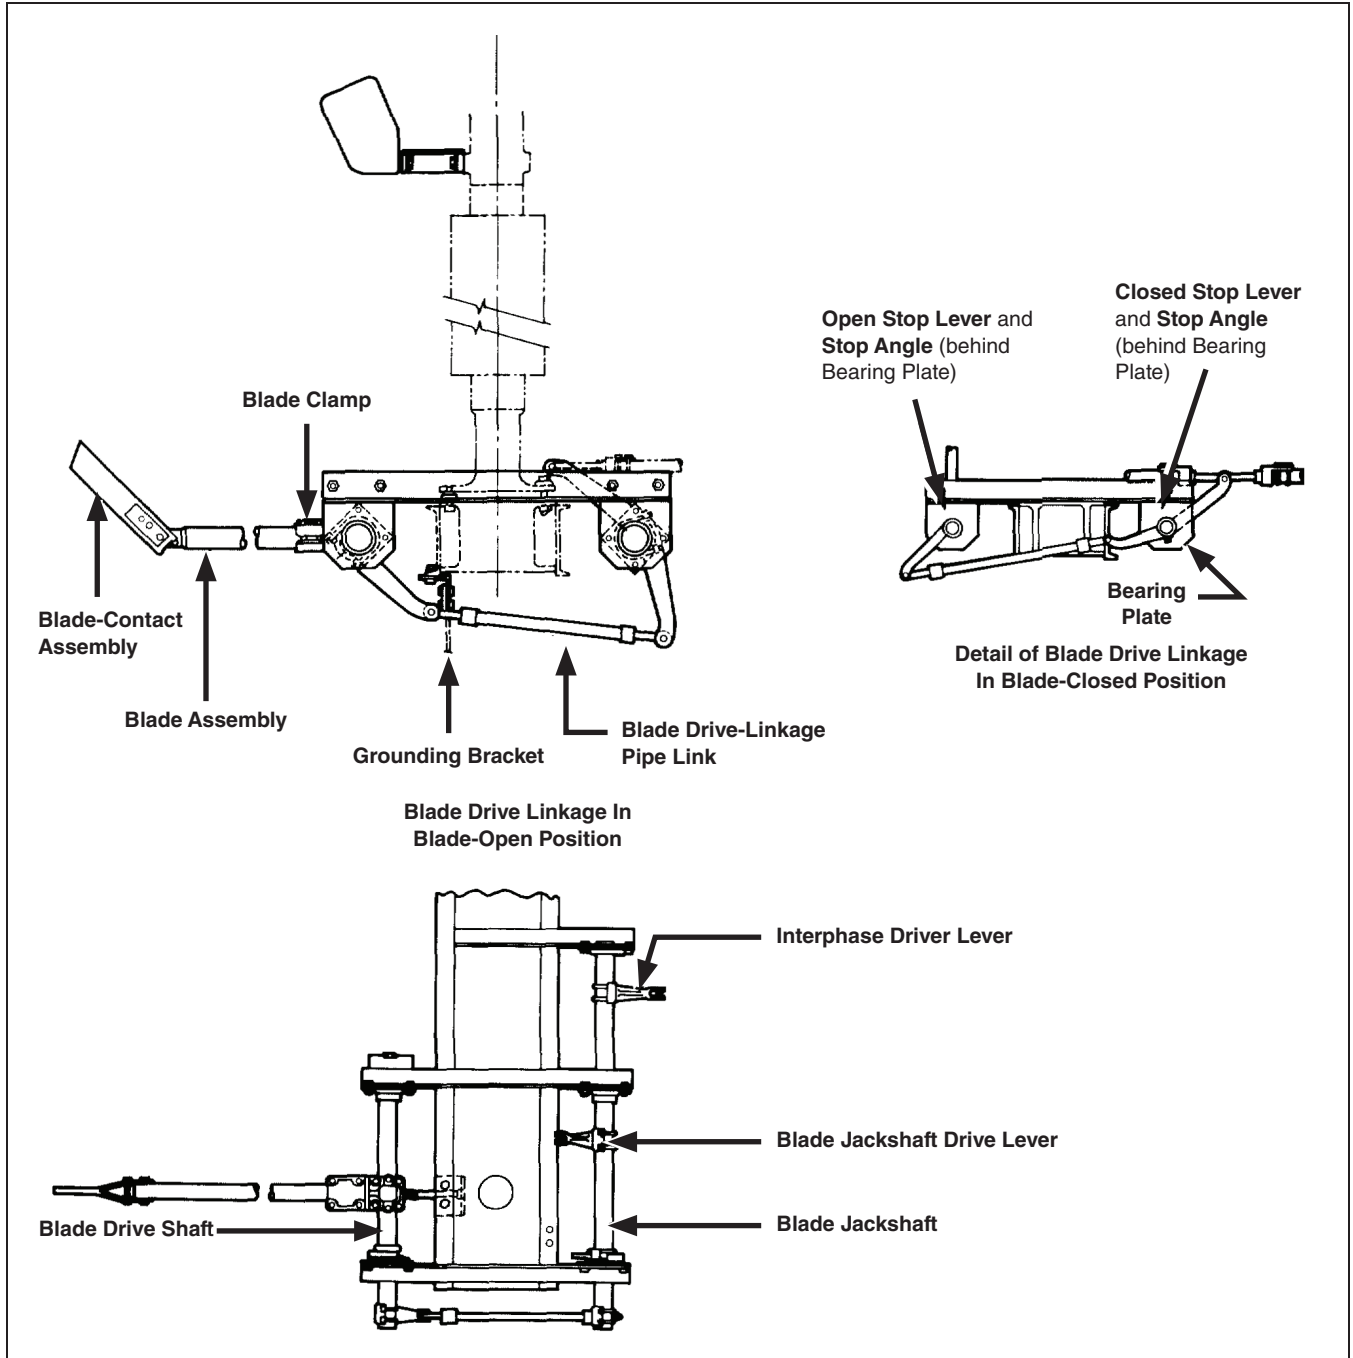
Typical grounding switch pole-unit blade assembly detail, shown for identification purposes. Arrangement may be opposite to that shown. For the actual application, refer to the erection drawing.
